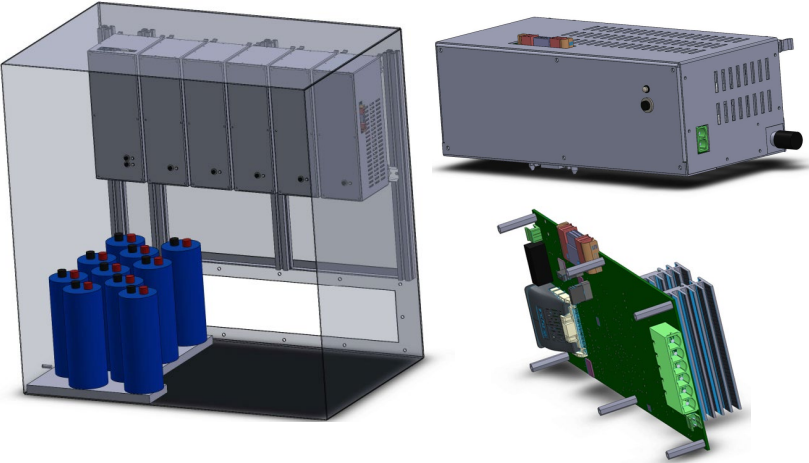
The concept of modular installation assembly and practical implementation of modules in a CAD environment.
